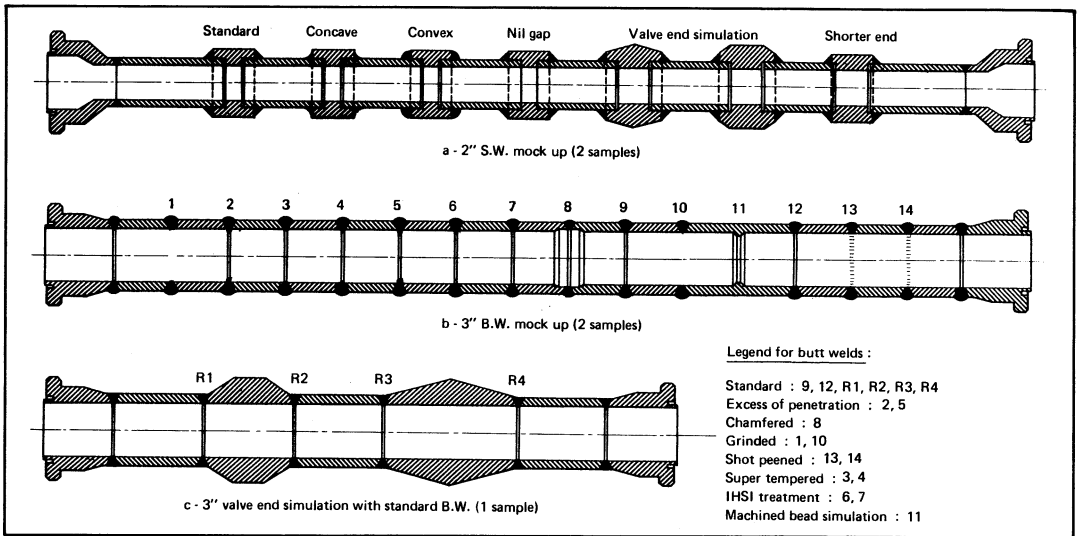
The 3 types of mock-ups (socket and butt welds).
